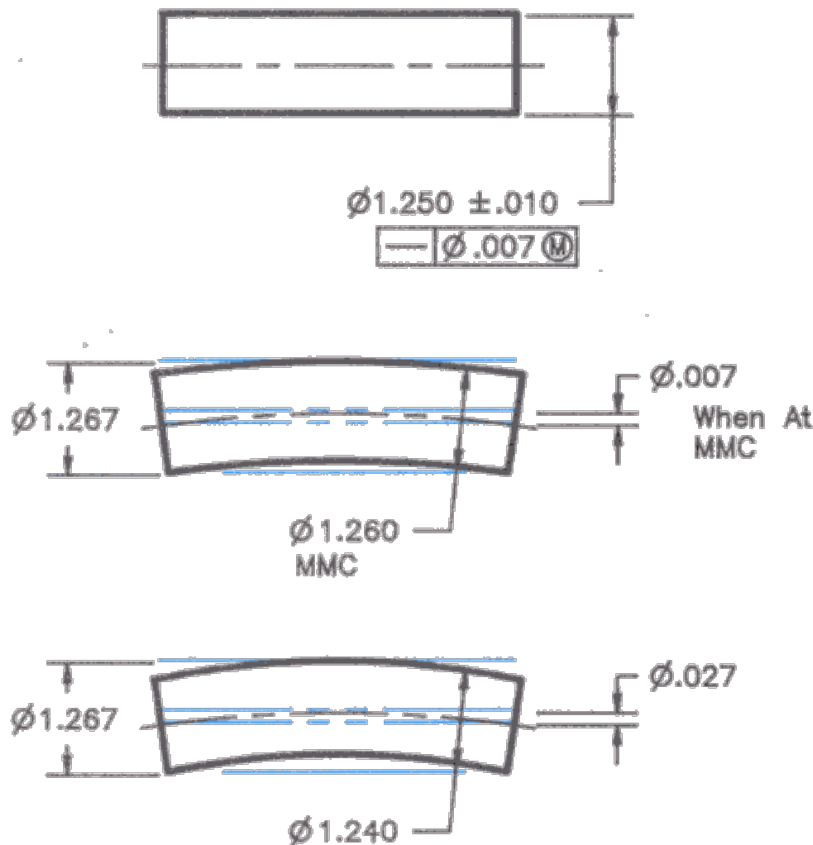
The permitted axis error applied to a cylinder has an effect on the apparent diameter of the cylinder. The combined effect of the MMC size and the permitted axis error is known as the virtual condition.
